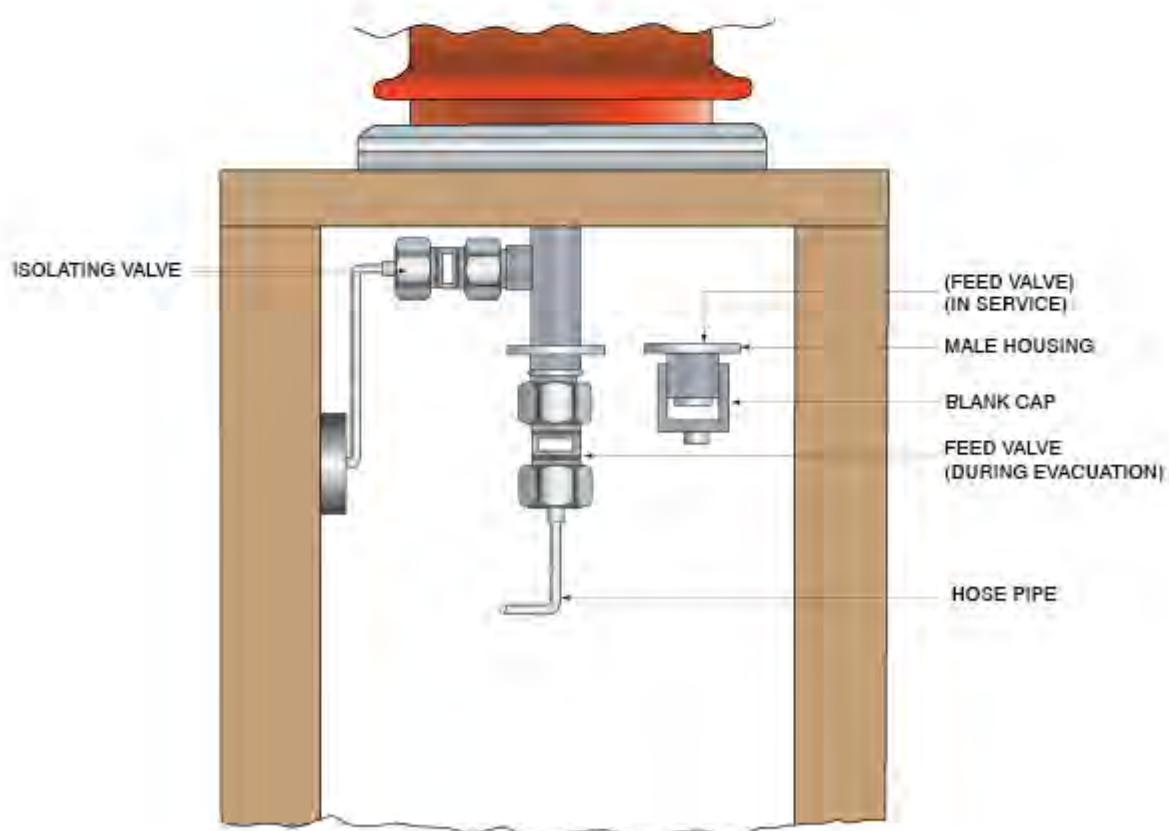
ASSEMBLY OF DILO VALVE POLE UNIT
